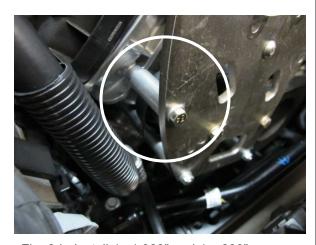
k: Install 1x 1.928" and 1x .280" spacers
